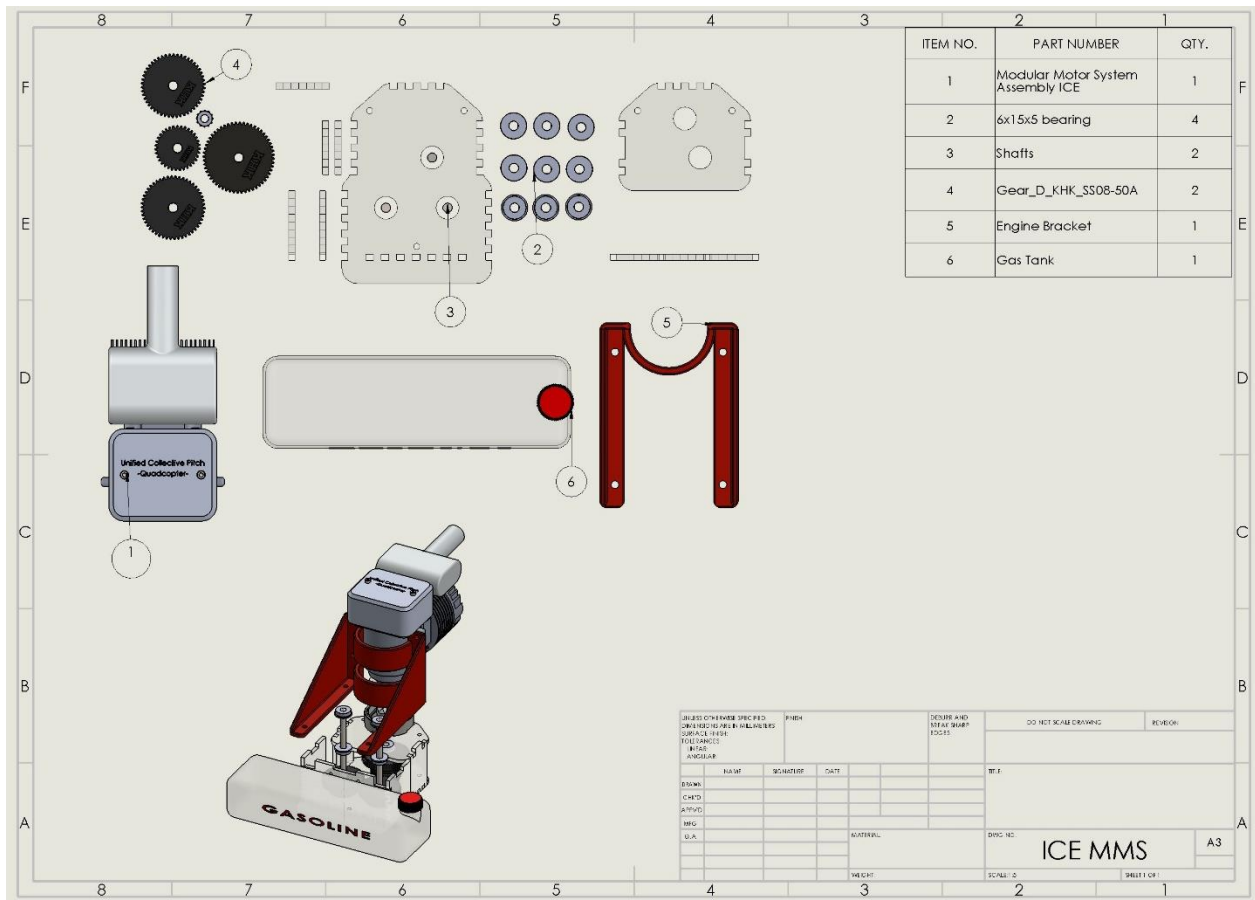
2D drawing, Exploded View & BOM of the MMS
